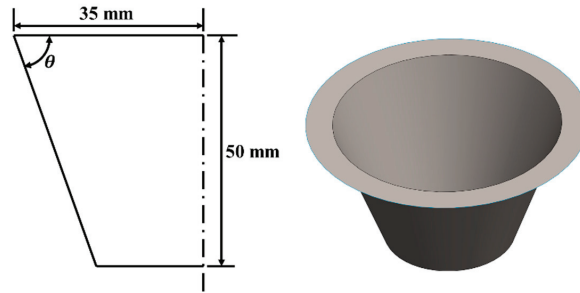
Constant wall angle truncated cone (CWATC) test geometry.
